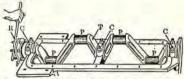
Spotting-in the lower halves of the crankshaft main bearings (Chevrolet as an example) by giving crankshaft bearing surface a thin coat of blue and placing it in the upper bearing halves; then place thin metal shims in place between upper and lower bearing caps and tighten all bearing caps. Then place a bar (R) between the flywheel bolts as shown and turn crankshaft several times, then remove bearing caps and examine for blue spots. If the bearings do not touch or fit snugly on the shaft it may be necessary to remove sough number of on the shaft it may be necessary to remove equal number of shims from each side. Scrape out the blue spots.
